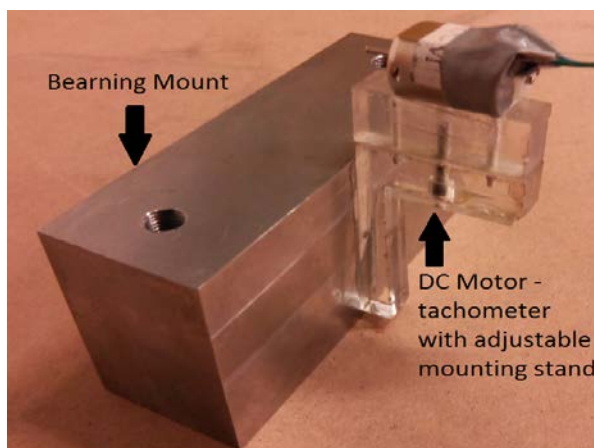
Image of the completed motor mount with DC motor tachometer already attached.
